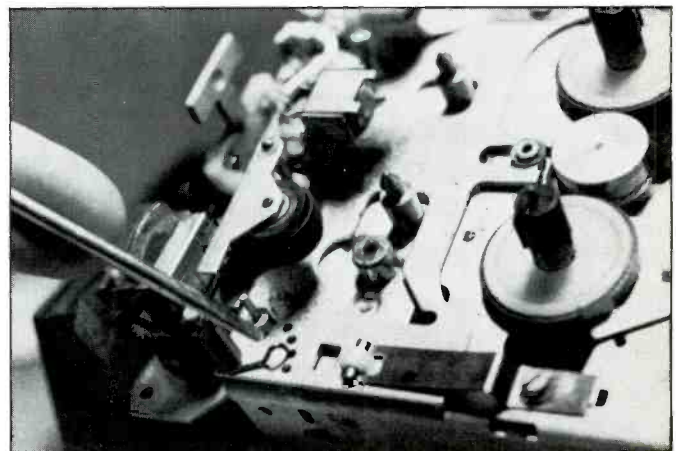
Pinch roller adjustment is indicated by the screwdriver. The flywheel and capstan spindle have been removed.
